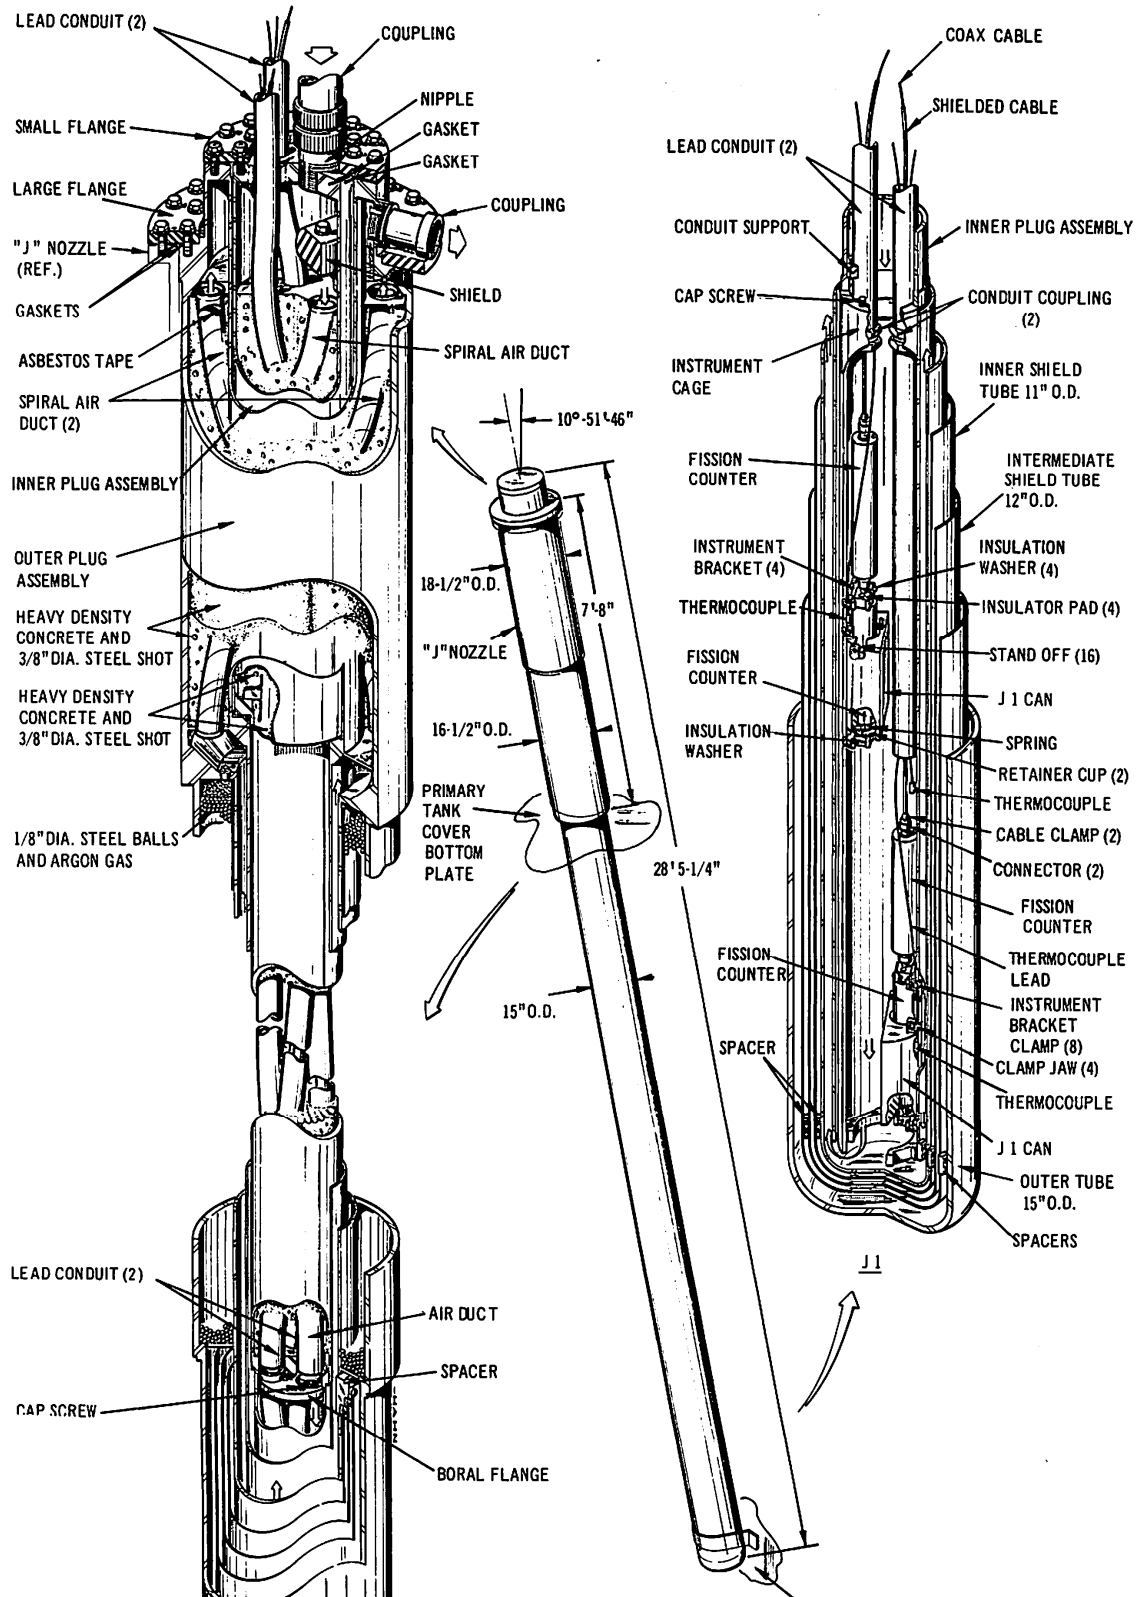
Figure 7.4-6 "J-1" Instrument Thimble Assembly (showing Original Instrumentation Arrangement) [Vol. II, Chapter 7, p.7.4-14]
